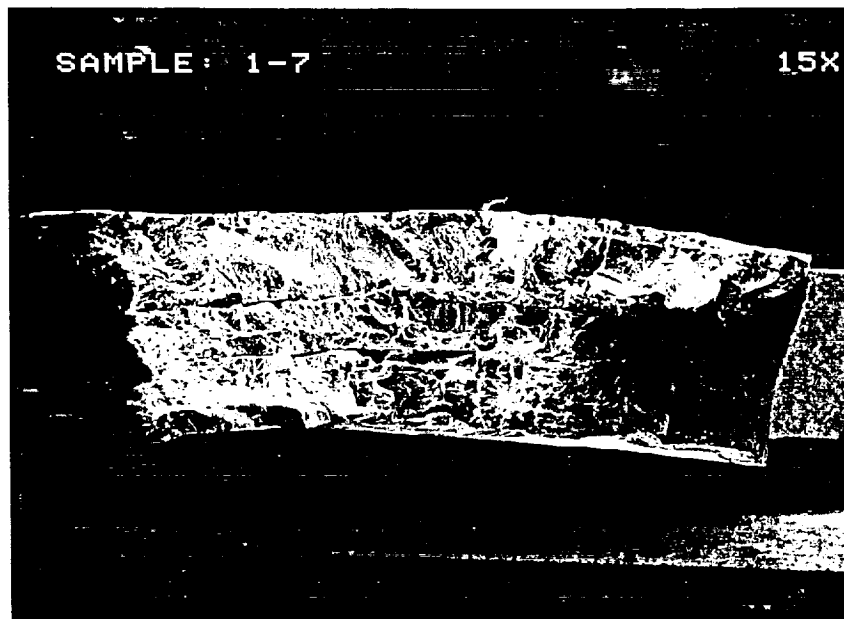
SEM view of fracture in tensile specimen 1-7, 1500F, annealed. 20X.
